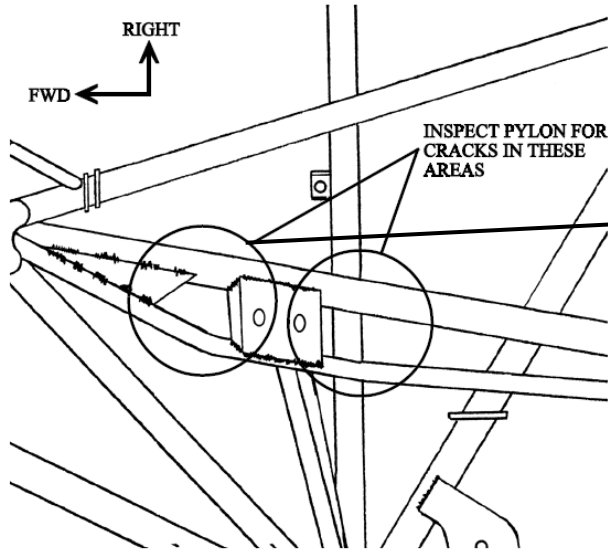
Belt Tension Assembly Pylon Mount Inspection Areas
